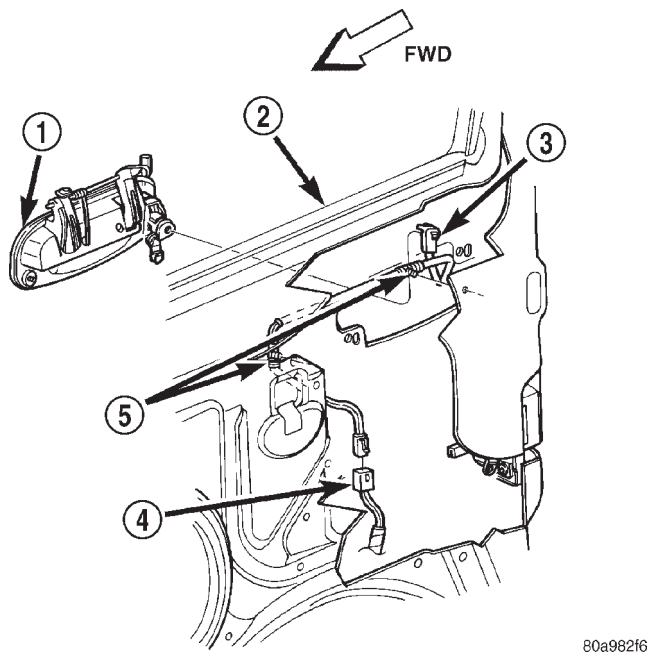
Door Lock Cylinder Switch Remove/Install - Typical
